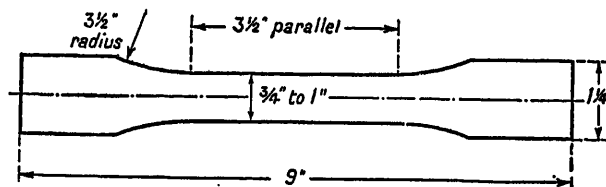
Specimen for Tensile Strength and Extension Tests.
